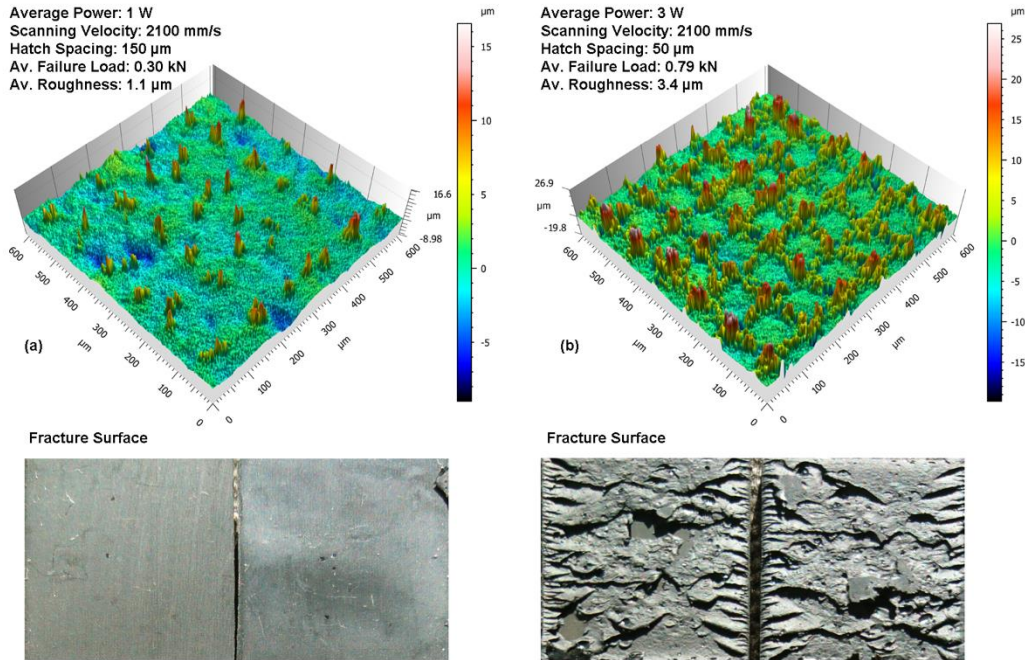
Measured topography of selected laser-treated surfaces and photographs of corresponding fracture surfaces for group 1, CL scanning strategy. Photographs show both 25 × 25 mm fracture surfaces for each individual test specimen.
